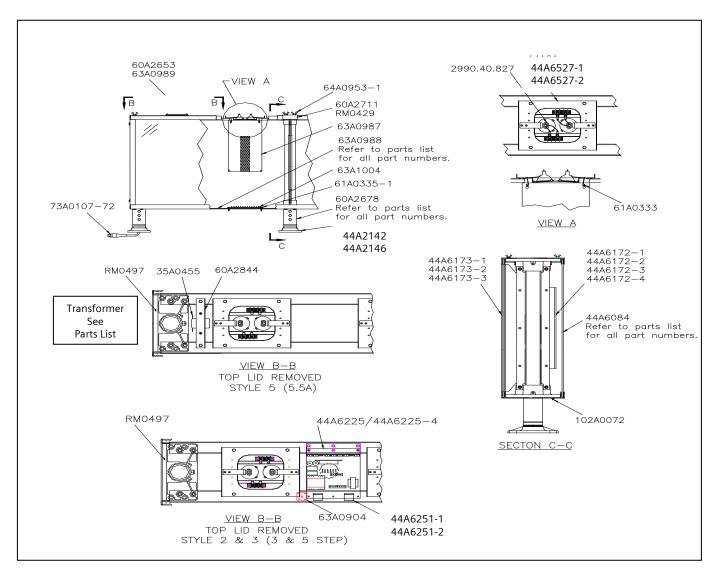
L-858 Sign Module Assembly (Shown with Backup Lamps)
